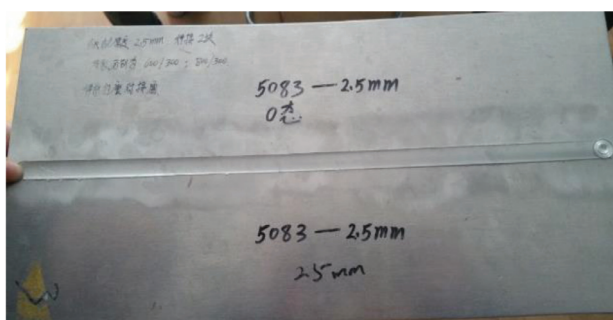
Welding test plate of 5083 aluminum alloy
